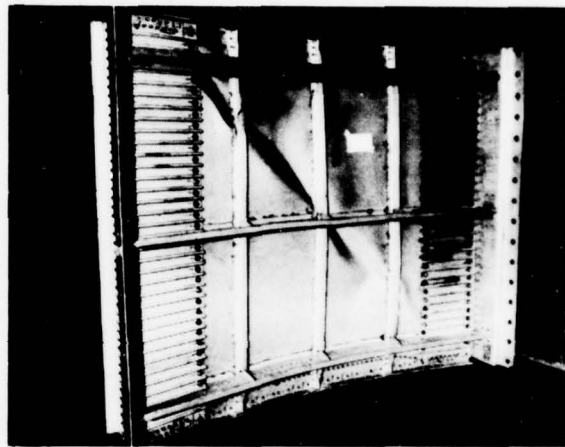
SHEAR AND COMPRESSION FAILURE - BACK VIEW
